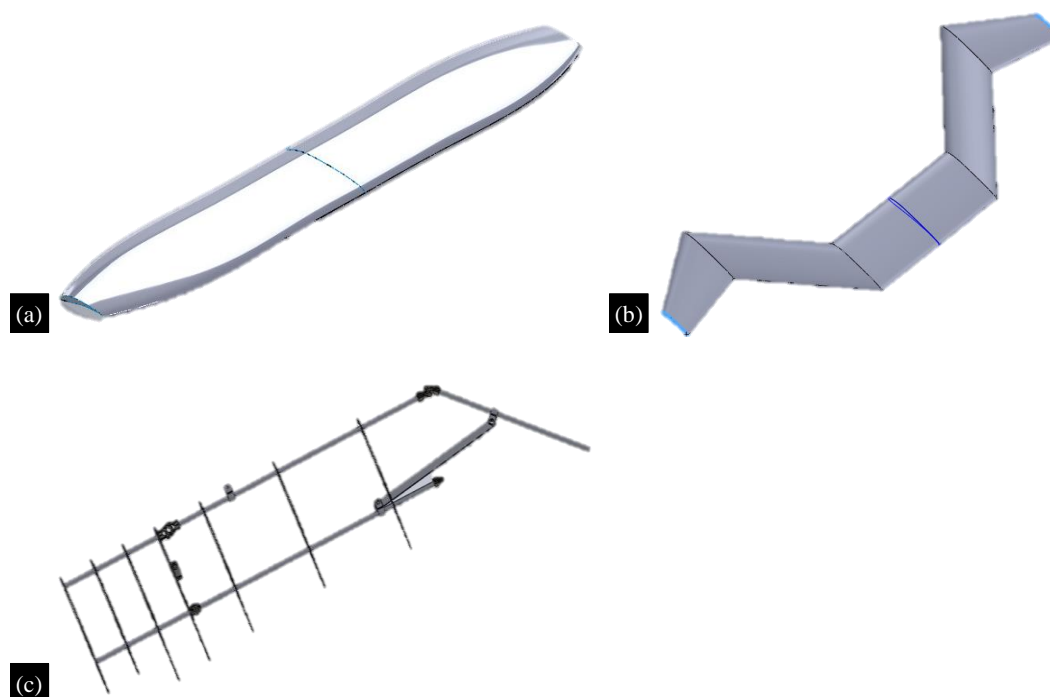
CAD model of morphed wing configuration. (a) Fully Extended Wing, (b) Retracted Wing, (c) CAD model of Morphing mechanism.
